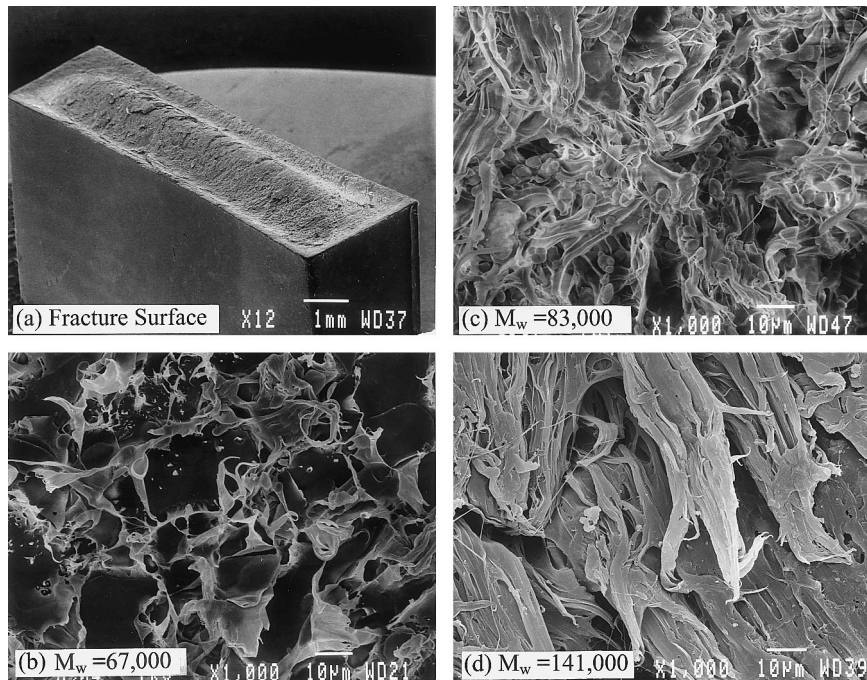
(a) Typical fracture surface of the low molecular weight PVC blend showing the trough of the weld line where fracture initiated and magnifications of the initiation site for (b) PVC $M_w = 67,000$; (c) PVC $M_w = 83,000$; and (d) PVC $M_w = 141,000$.
